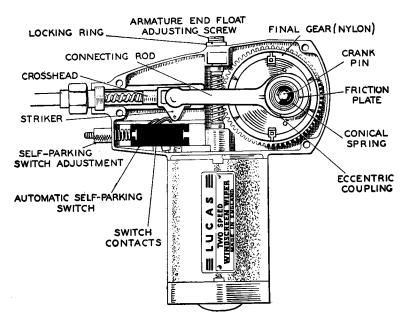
Showing the DR1 wiper motor with cover plate removed.
